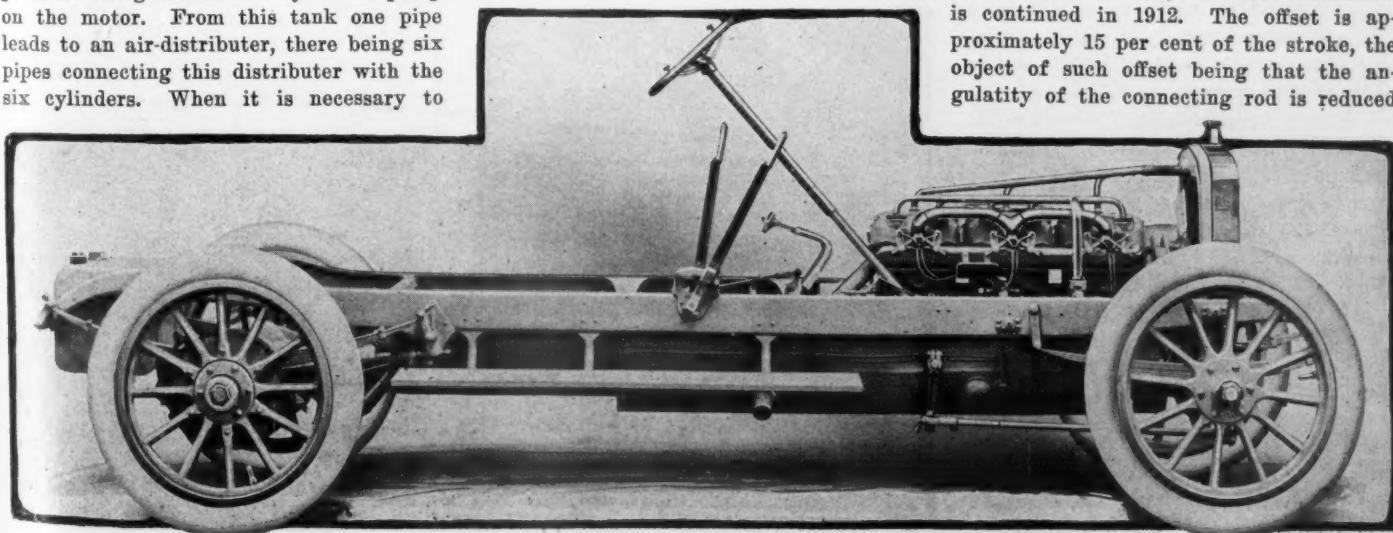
SIDE VIEW OF WINTON 1912, SIX-CYLINDER 48.6-HORSEPOWER CHASSIS
